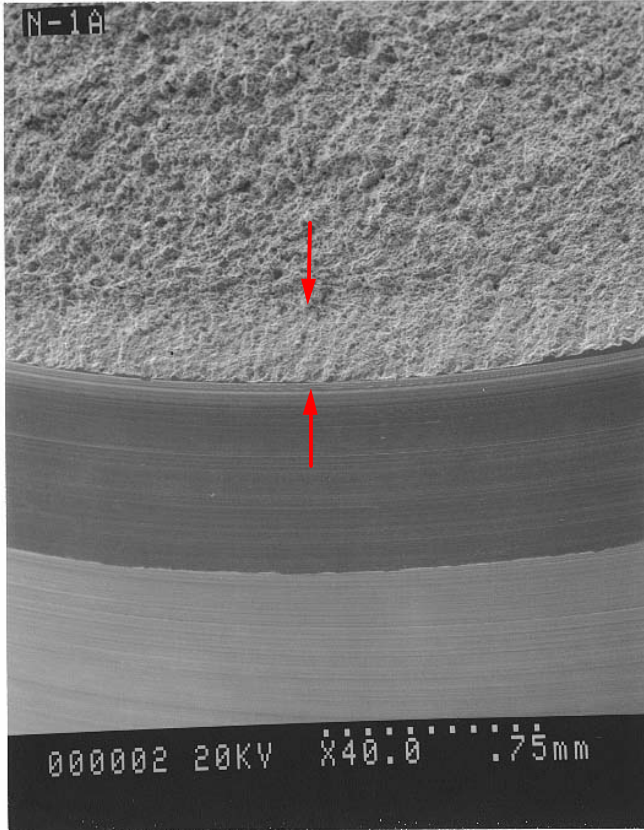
Specimen N-1A after the test. Fracture face (below) shows initiation and reflective band (between arrows) at bottom of view and final shear lip at top.
